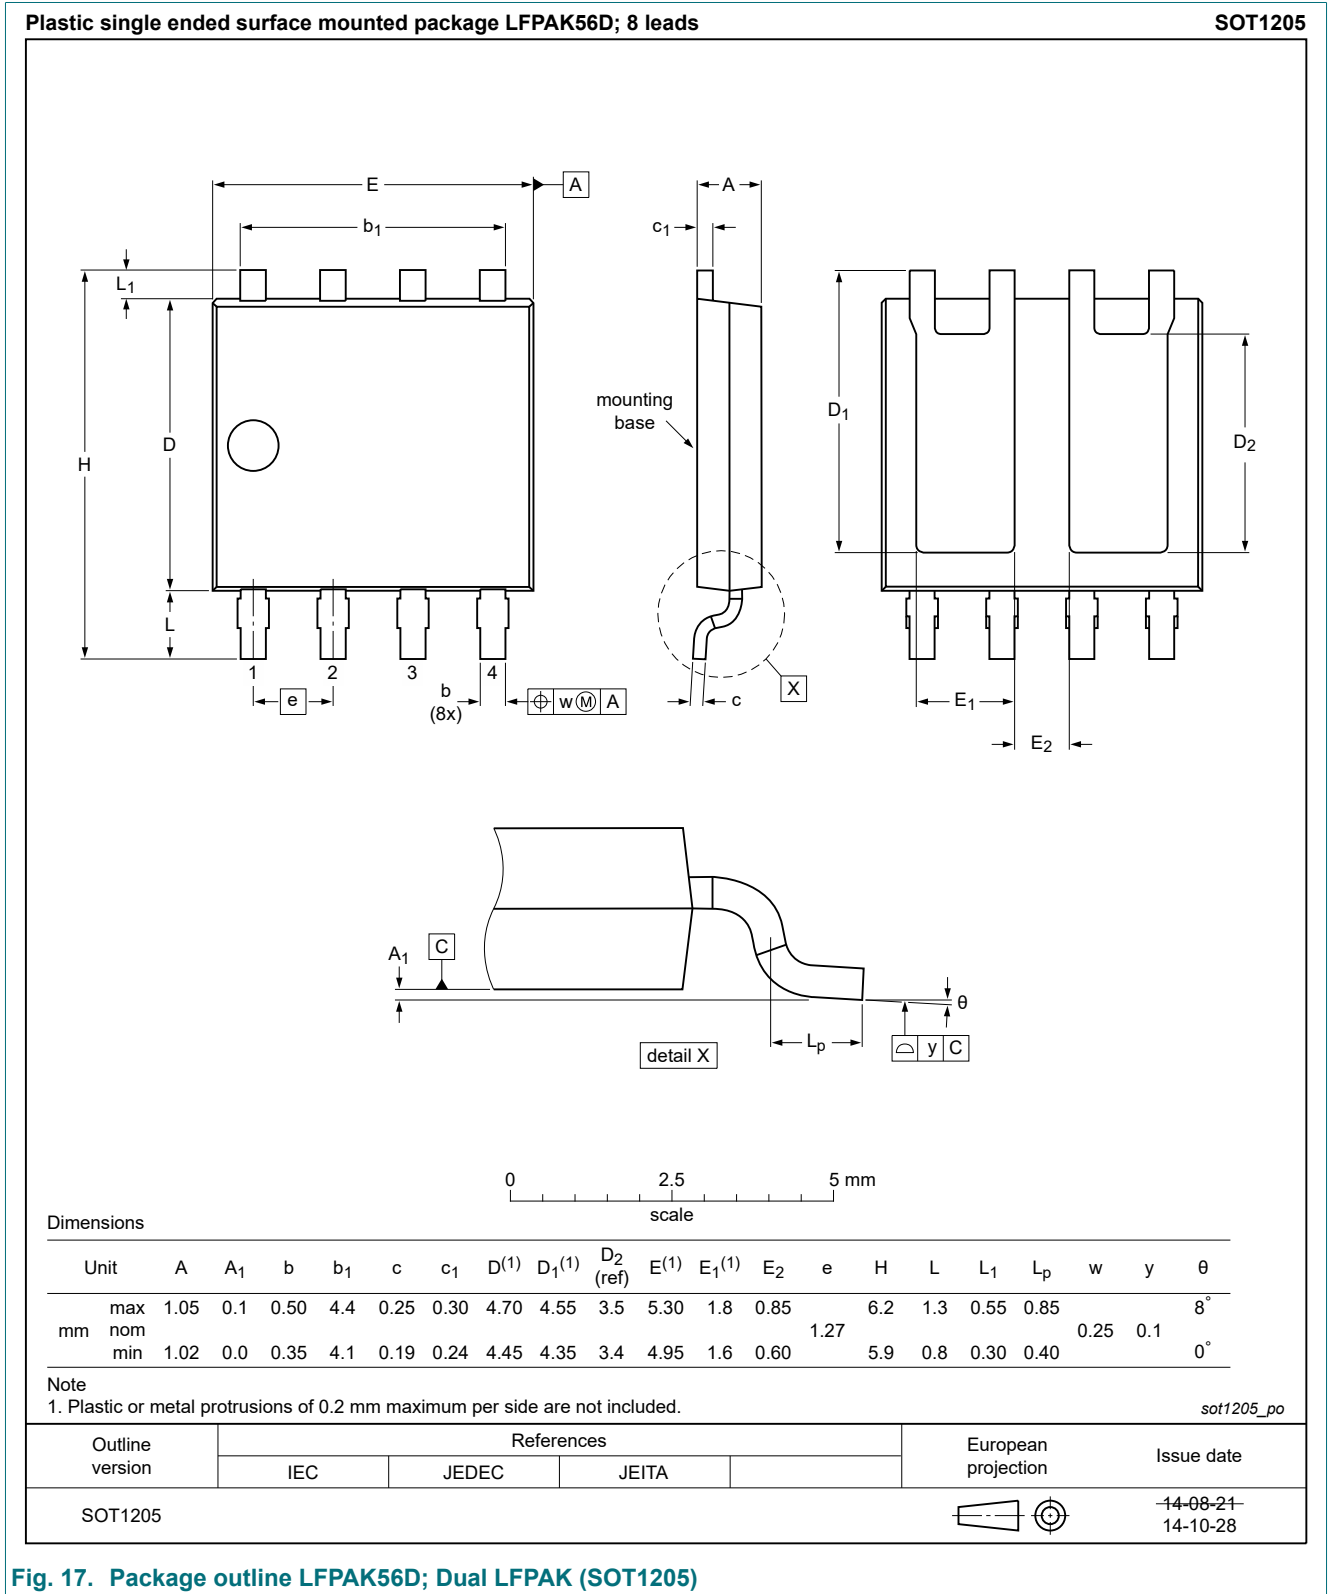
Package outline LPAK56D; Dual LPAK (SOT1205)
